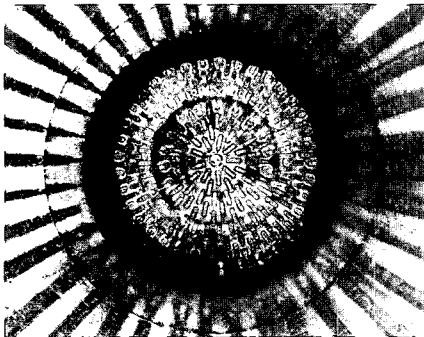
Modification of injector arrangement for KSR-III injection head (radial → H-type)
